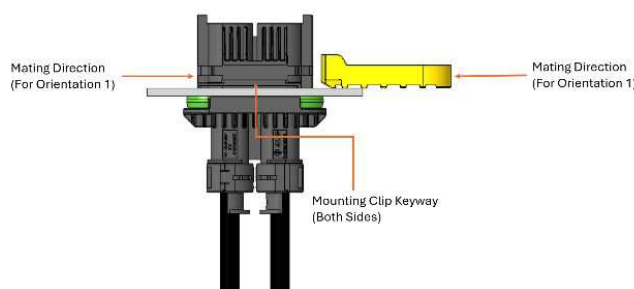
b.: Assembly of DT Highspeed 2 port Bulkhead Pin Assembly to Panel
